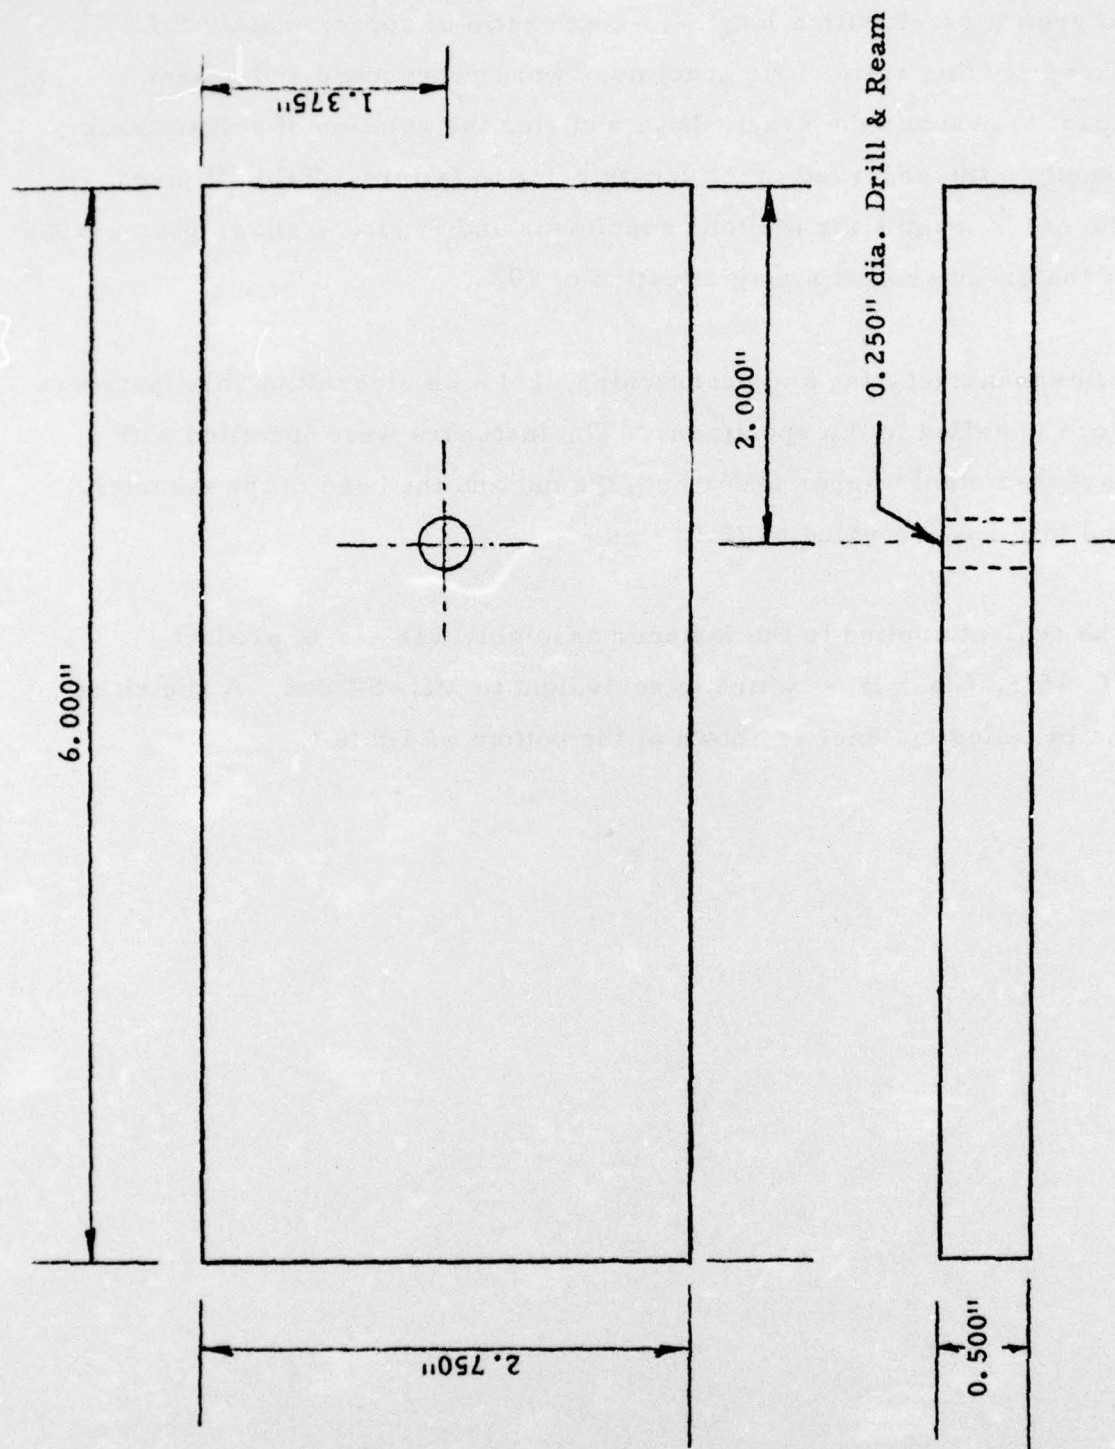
FATIGUE CRACK SPECIMEN
